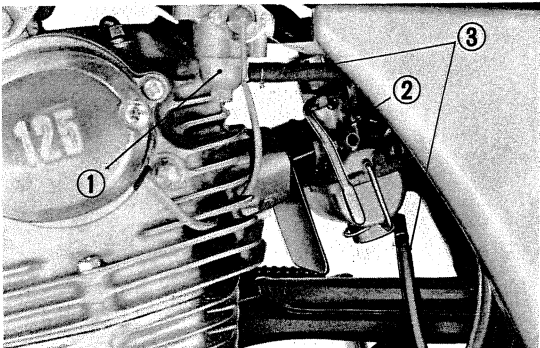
① Fuel cock ② Carburetor ③ Fuel pipe
